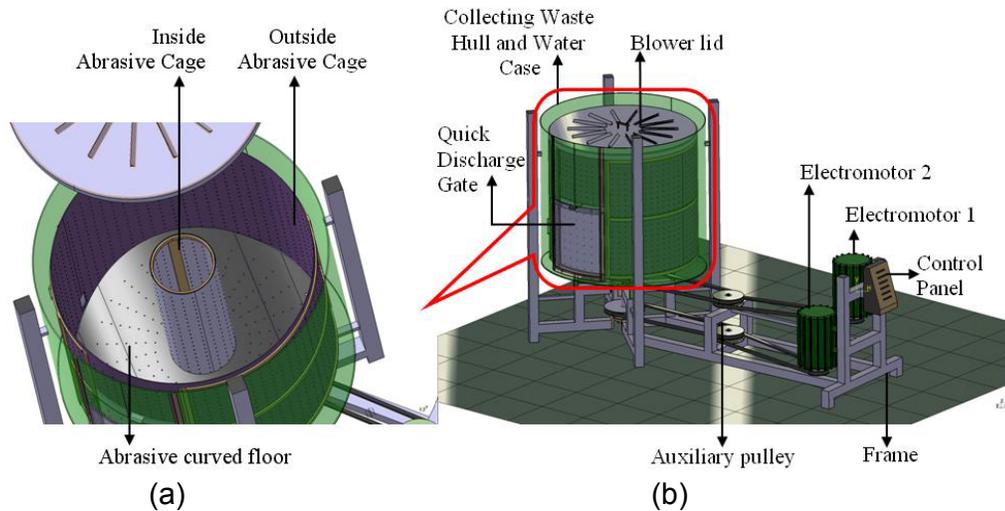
General view of the proposed multipurpose machine: (a) Machine process chamber, (b) Different parts of the machine.
